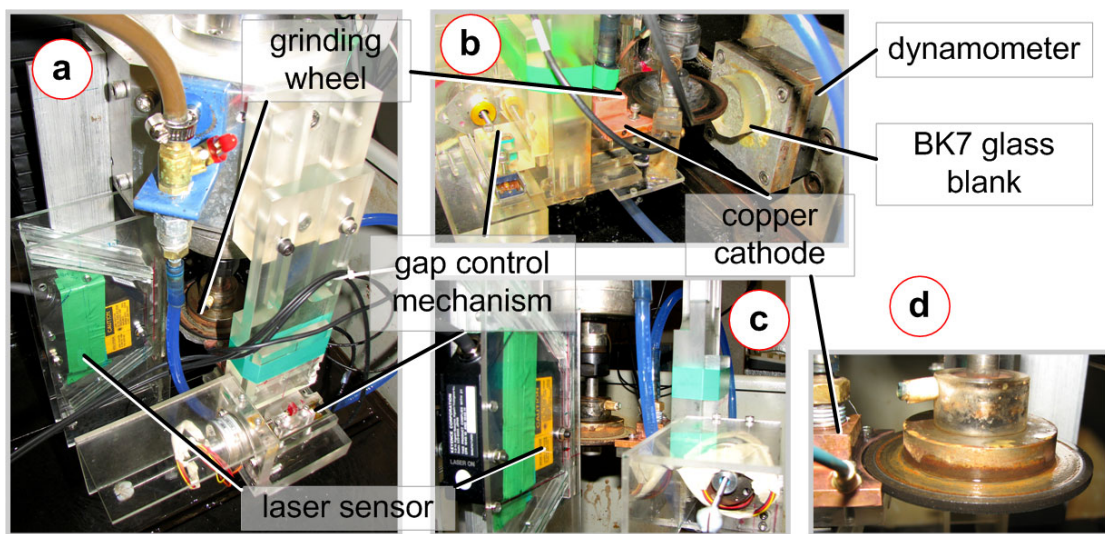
Close-up photographs of the grinding scheme with sensor and fixture accessories
